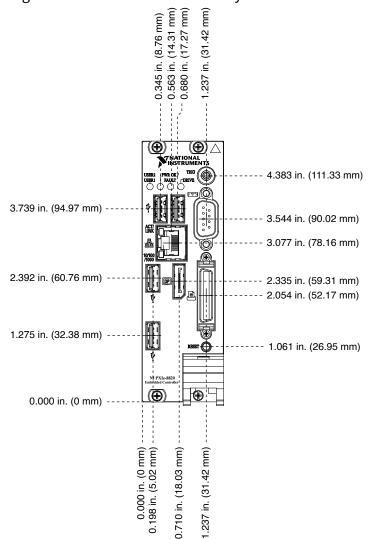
PXIe-8820 Front Panel Layout and Dimensions
